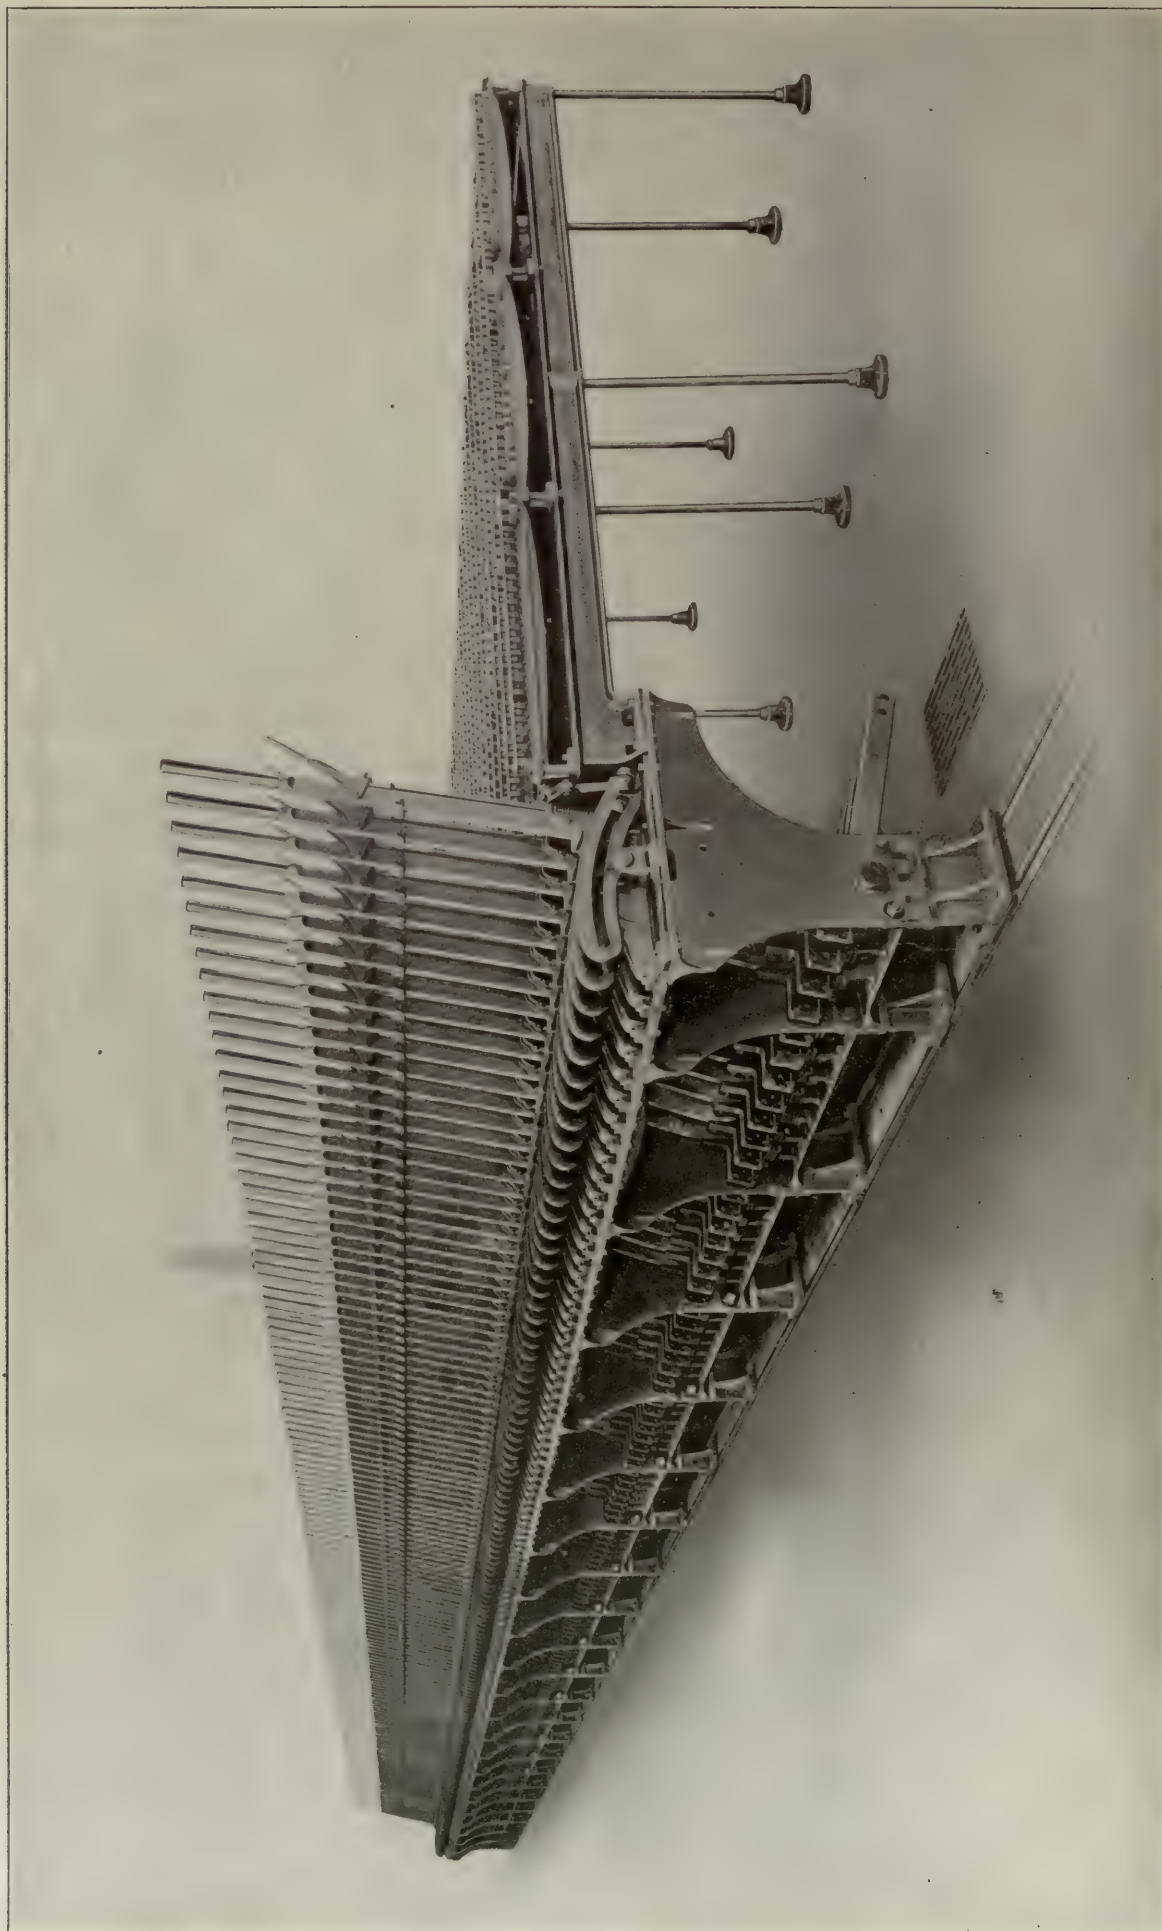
One-hundred-and-seventy-two-Lever Saxby & Farmer Interlocking Machine Assembled in Factory.
